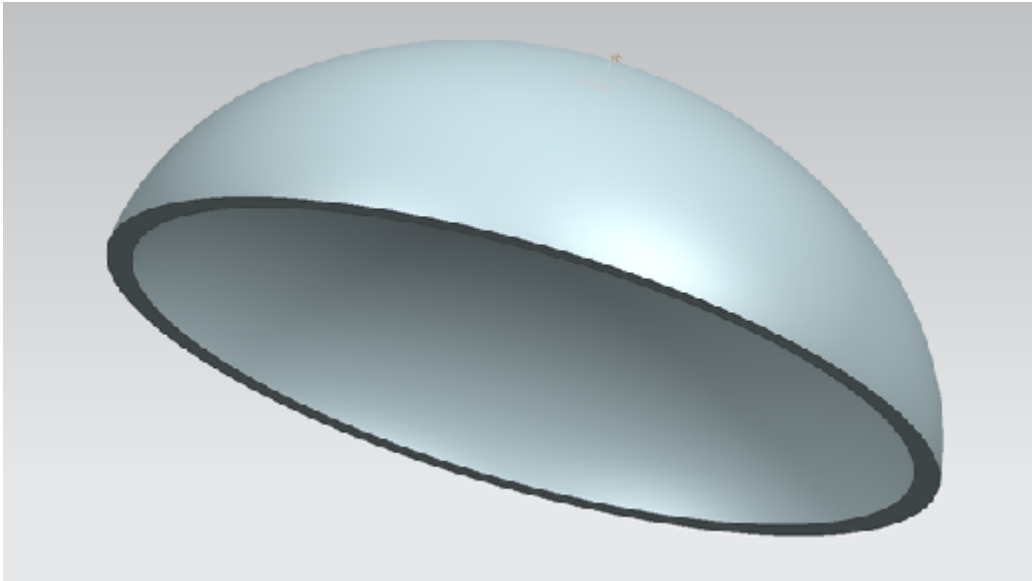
CAD model of the biomimetic mold used in fabricating the robot bell.
